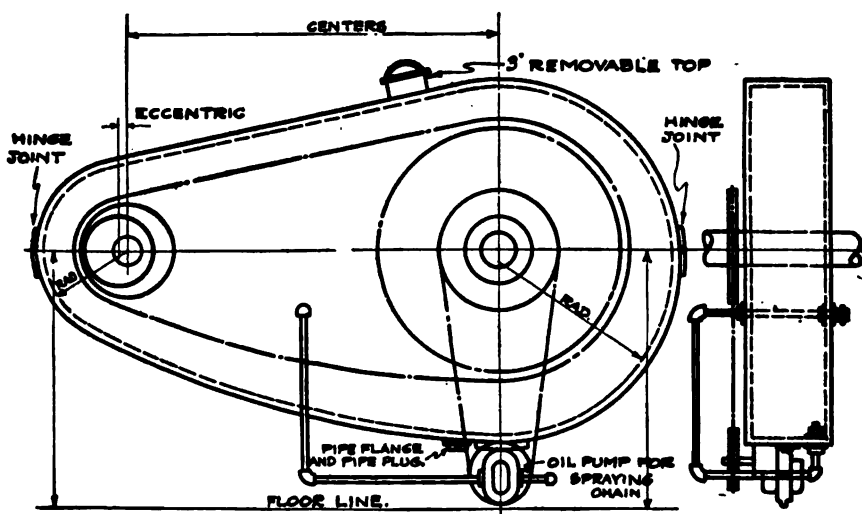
SEC. 10h.—Dust- and oil-tight casing with oil pump for Link-Belt silent chain drive.
